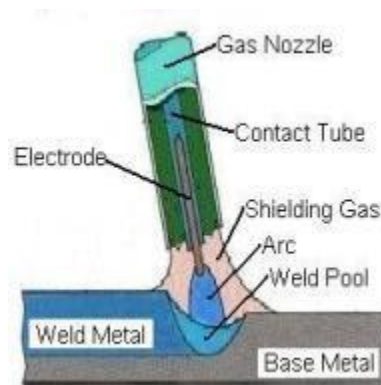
Schematic of Metal Inert Gas (MIG) Welding
